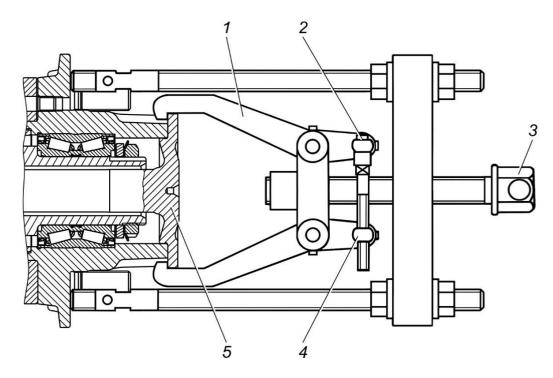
Rear axle shaft removal: 1 – legs; 2 – bolt; 3 – screw; 4 – axle; 5 – axle shaft
